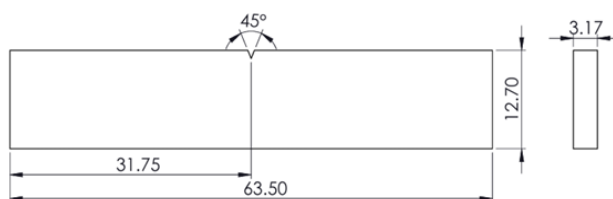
ASTM D256 (Izod Impact Test), the standard specimen dimensions in millimeters (mm).
